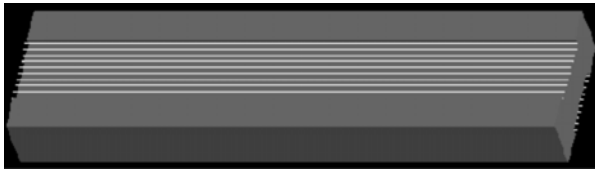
PLACEMENT OF COTTON YARNS IN A MOULD
